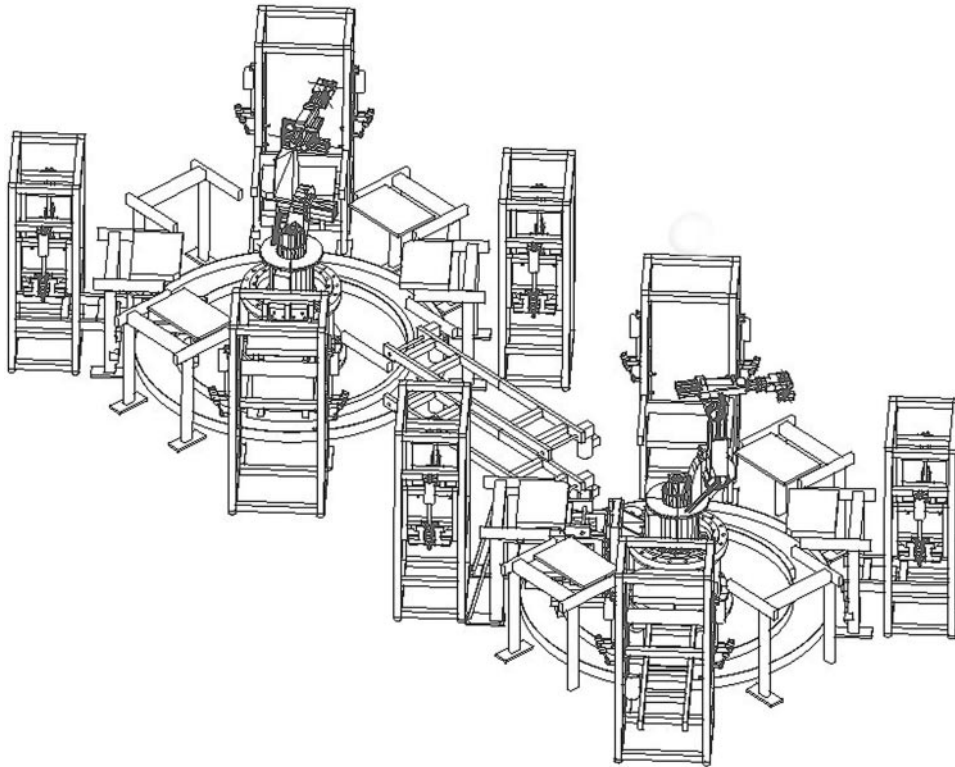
Isometric view of multi-station flexible automatic assembly system.
